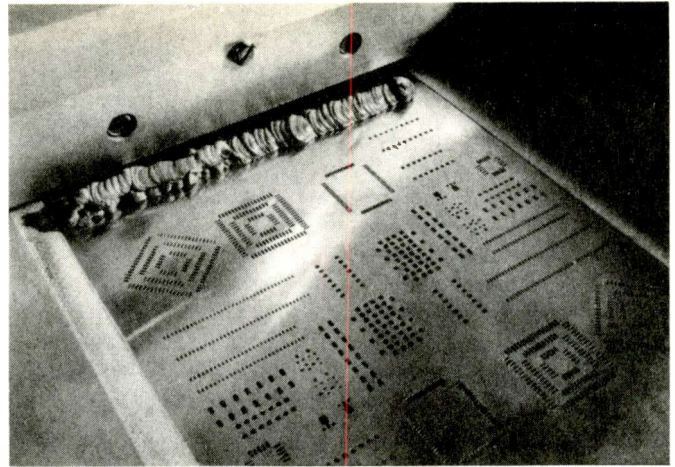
A brass stencil for the precision application of solder cream during SM assembly manufacture. The cream, at the top, is ready to be wiped across the stencil, which is precision aligned with the PCB beneath it.
